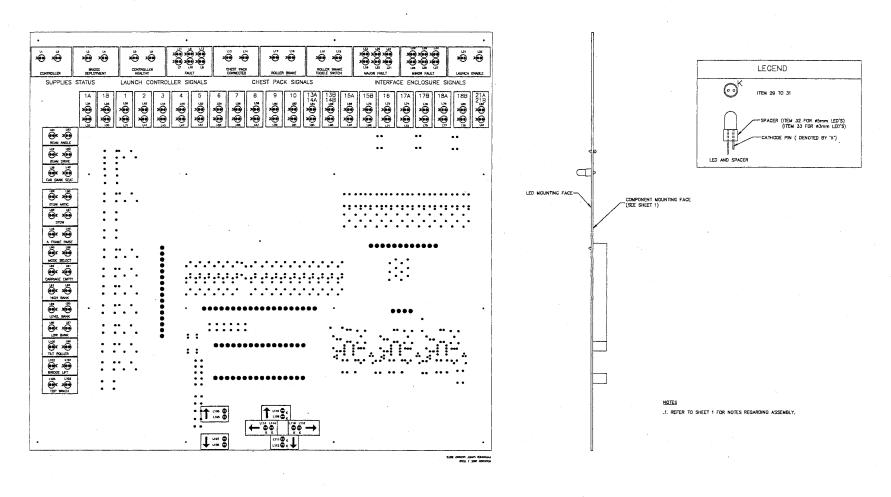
LAUNCHER ENCLOSURE BITE PANEL PCB
